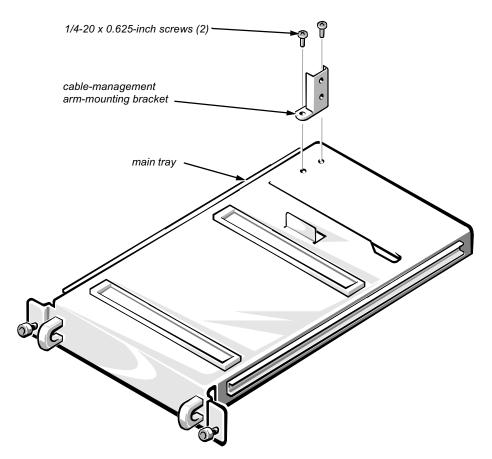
Installing the Cable-Management Arm-Mounting Bracket
